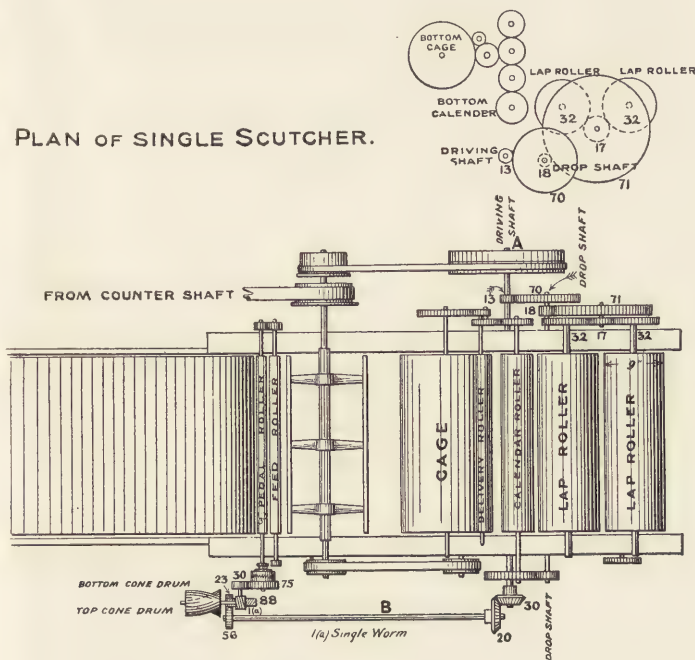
PLAN OF SINGLE SCUTCHER, ALSO SHOWING THE ELEVATION OF THE GEARING AT THE LAP END.
